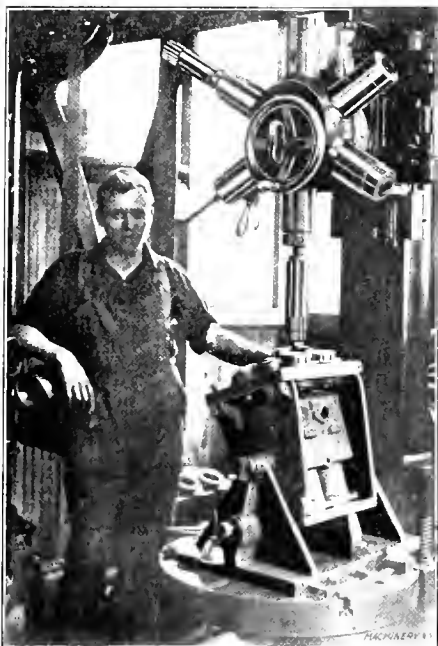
Tilting Jig for Holding Cylinder while Drilling and Reaming Valve Holes
